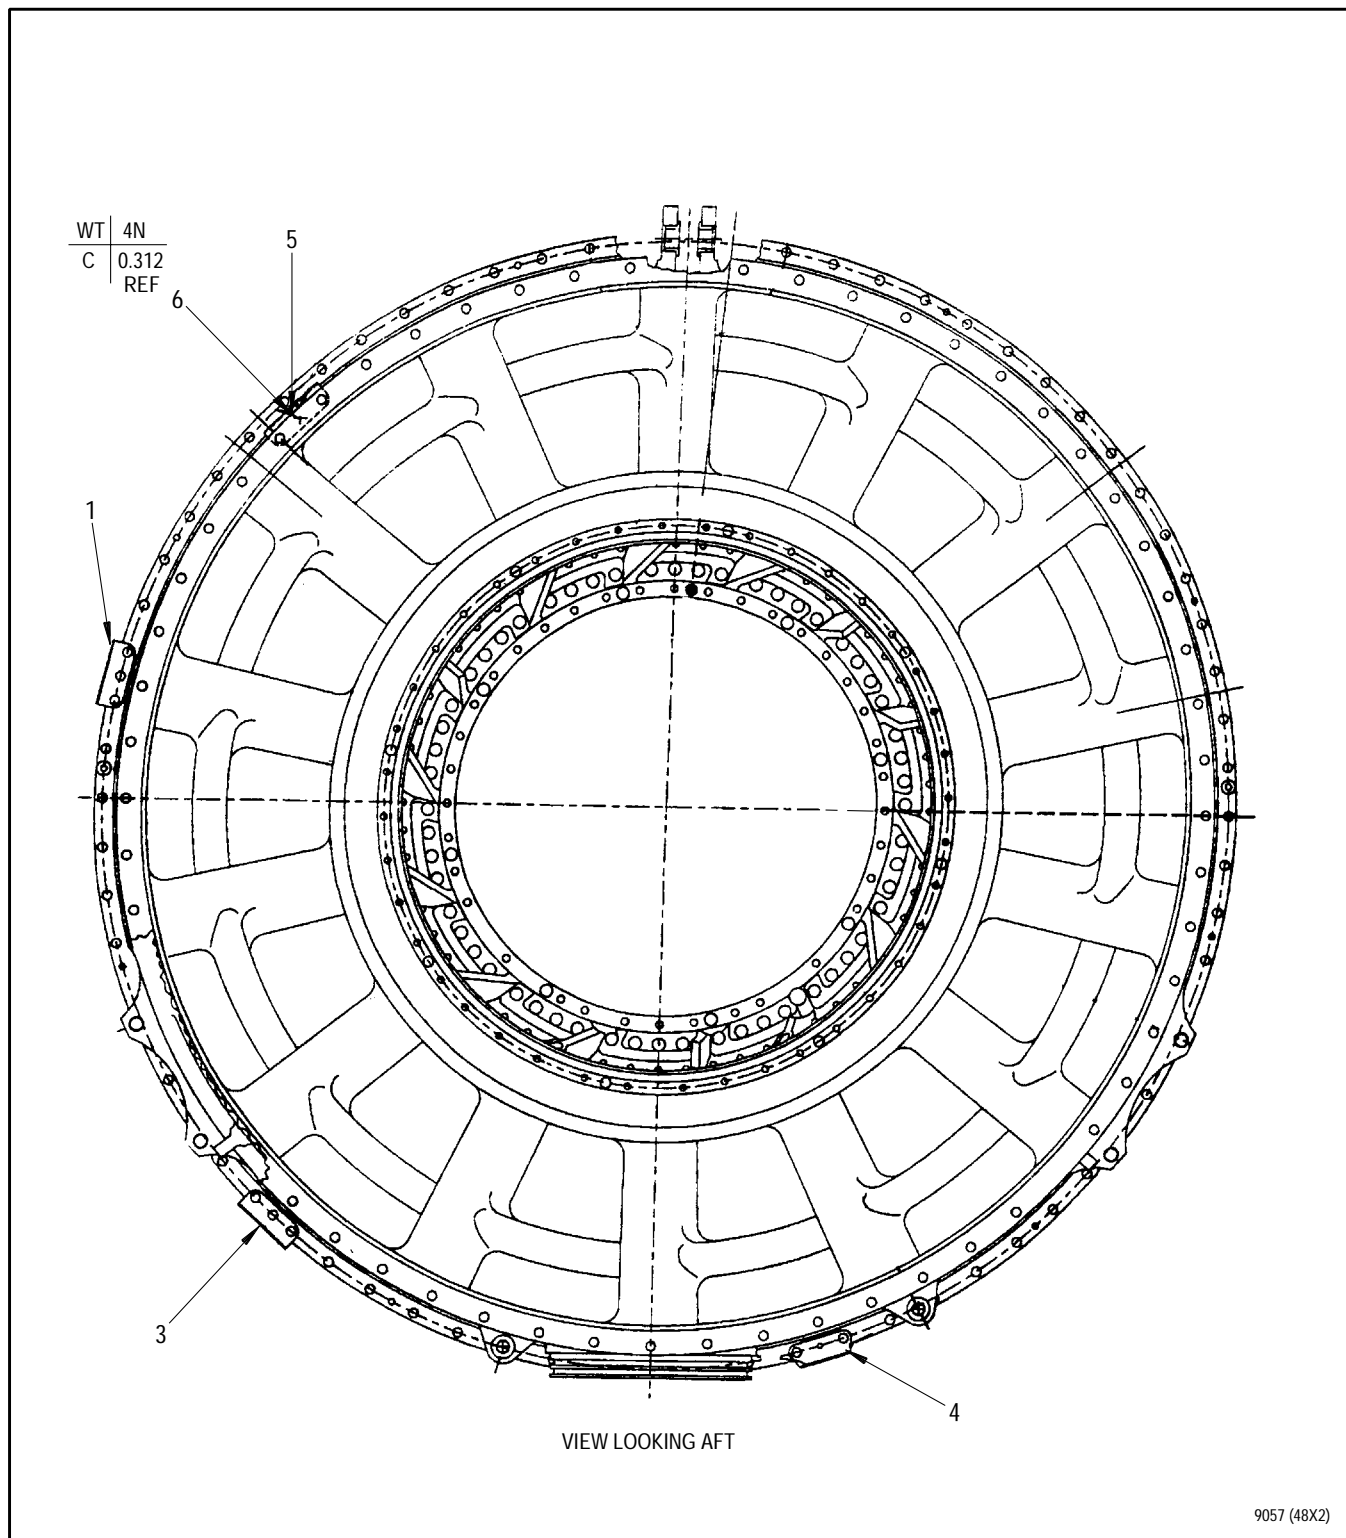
Compressor Intermediate Case Assembly - Bracket Replacement (Sheet 2 of 2)
